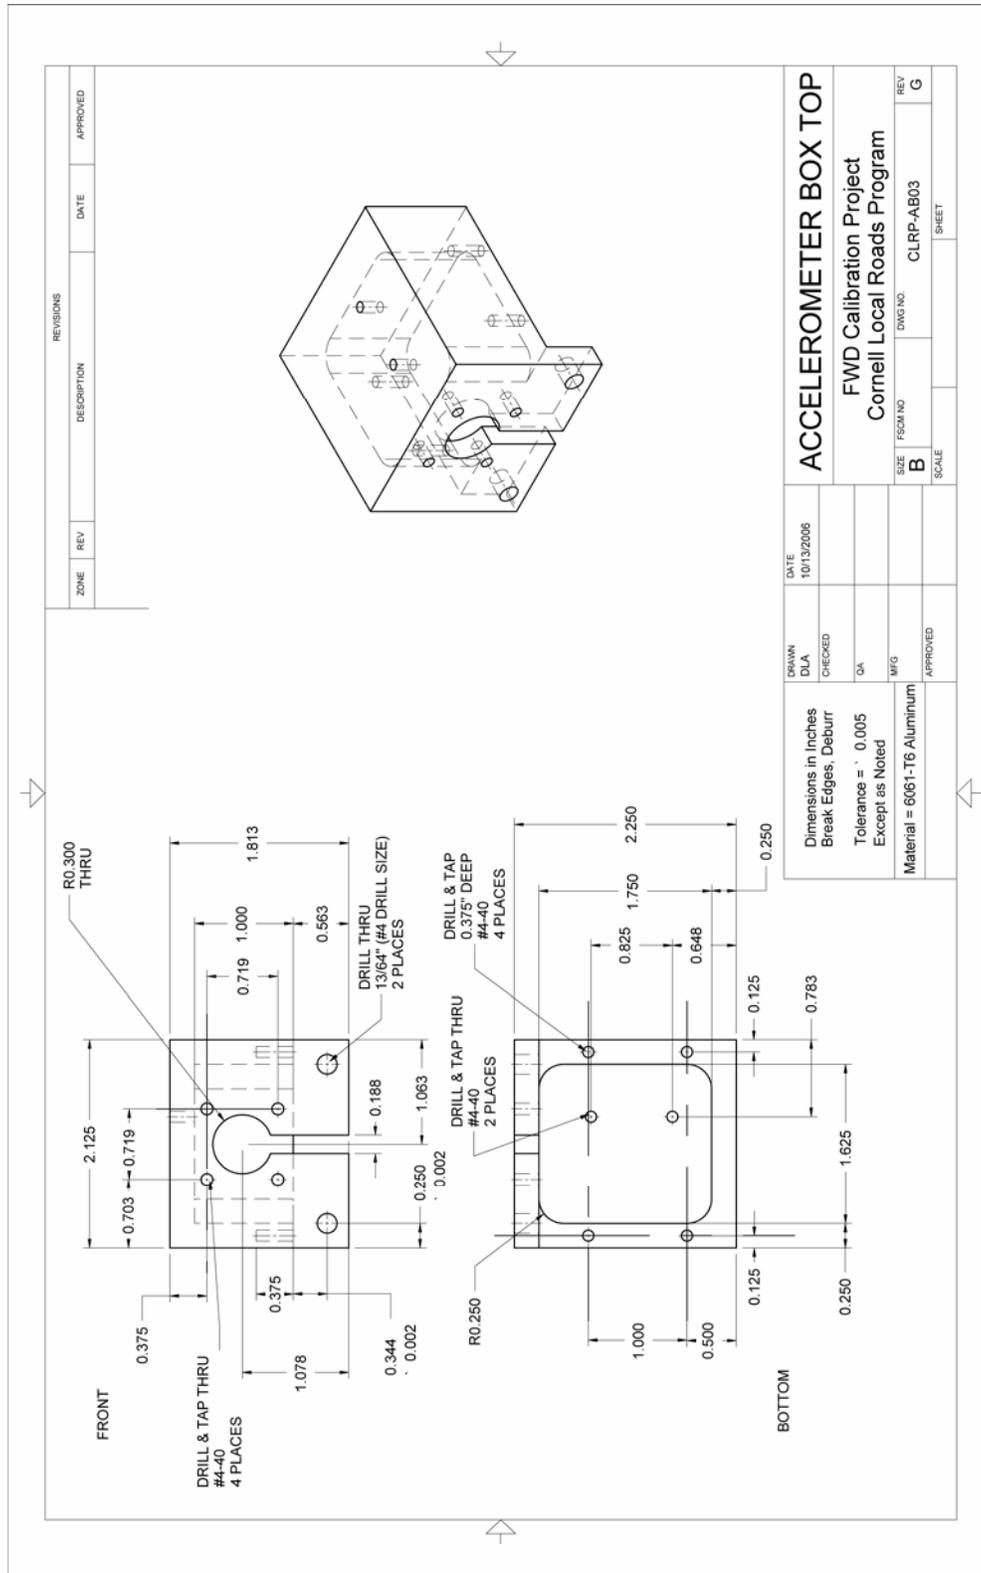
Drawing. CLRP-AB03 Accelerometer Box Top.
